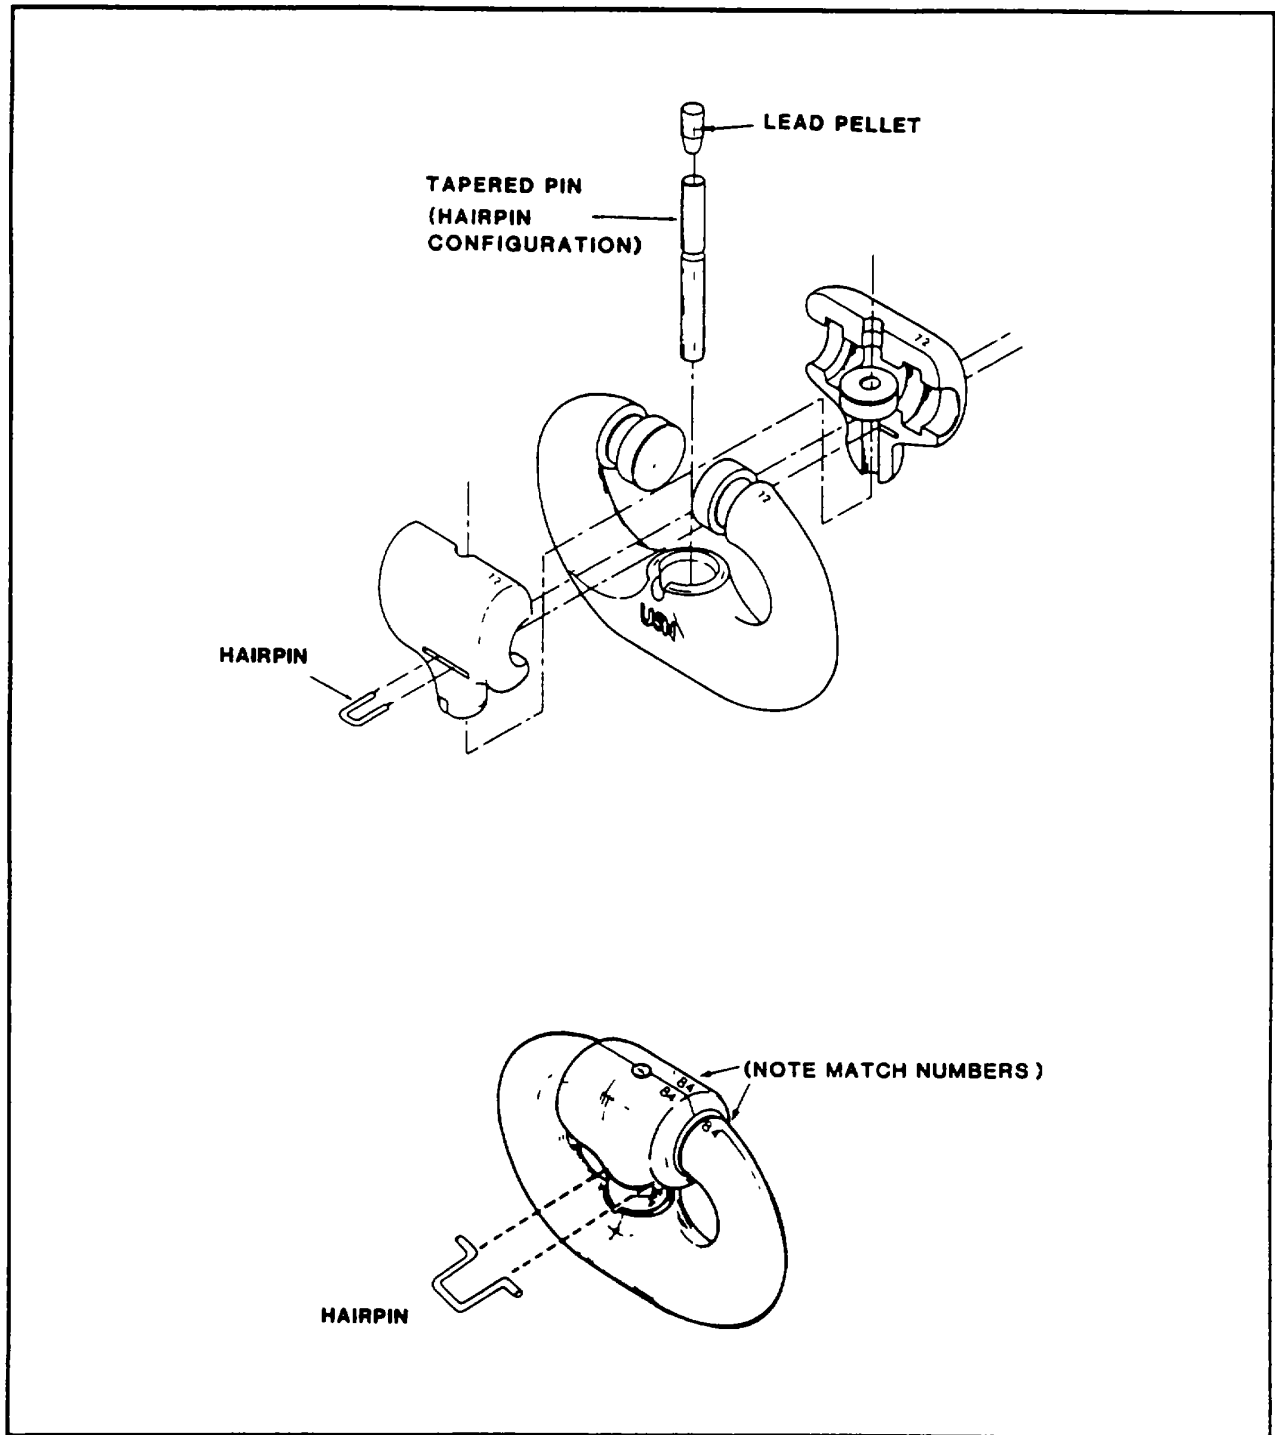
Detachable Line with Identifying Marks for Assembly.
